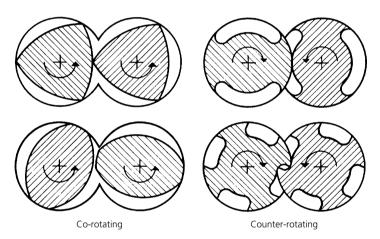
Examples of cross-sections of co-rotating and counter-rotating extruder elements.
